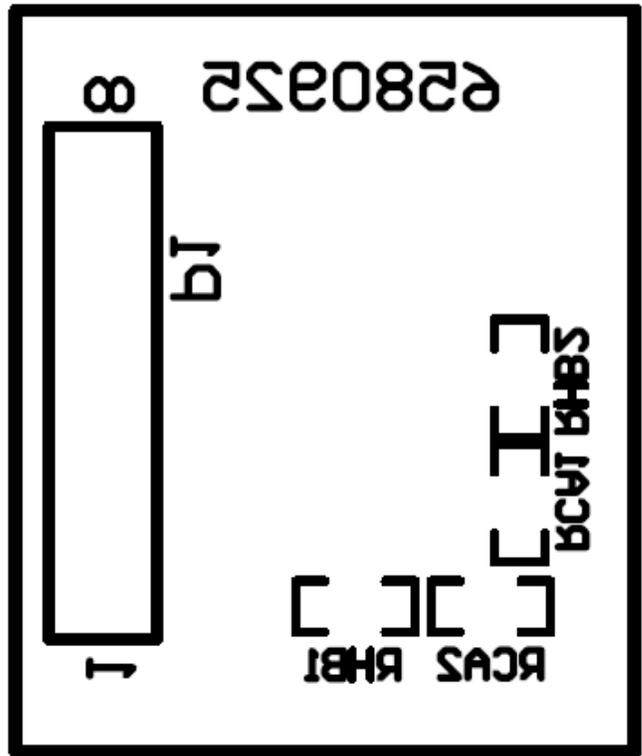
SFH7050 Sensor Board Bottom Silk Screen
